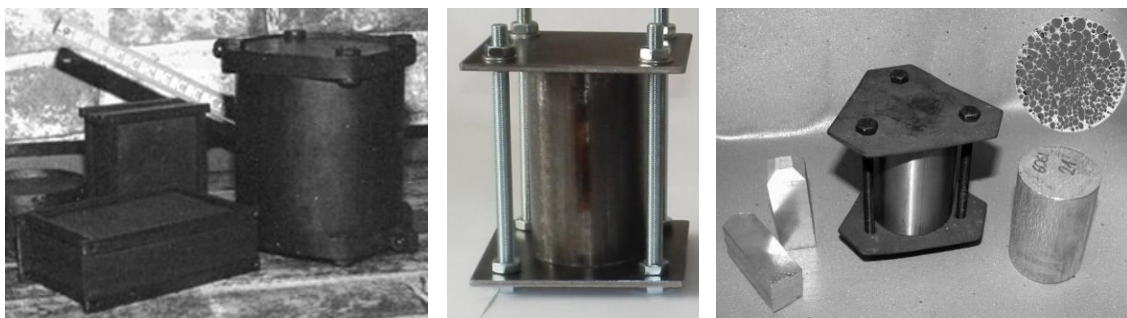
Foaming mould for the production of aluminium foams by powder metallurgy (left), JERZ [56], different designs of the foaming mould (middle), foaming blank, mould and cut made with aluminium foam (right), LEHMHUS [57]
